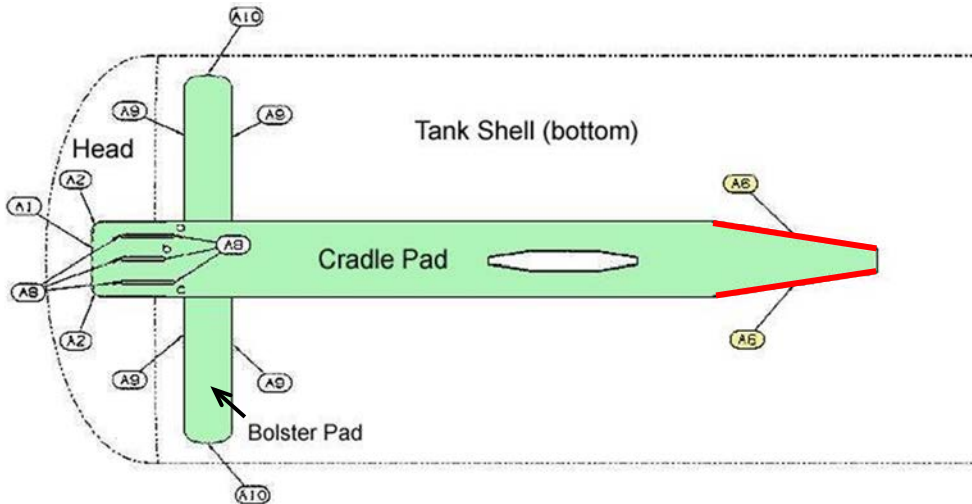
ACF-200 underframe general layout and weld identification numbers from AAR Data Collection Template. The red highlighted A6 welds are referenced in later sections of this report.
